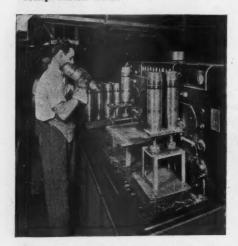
Silver brazing adapters in the nose of high explosive shells with induction heating equipment.
